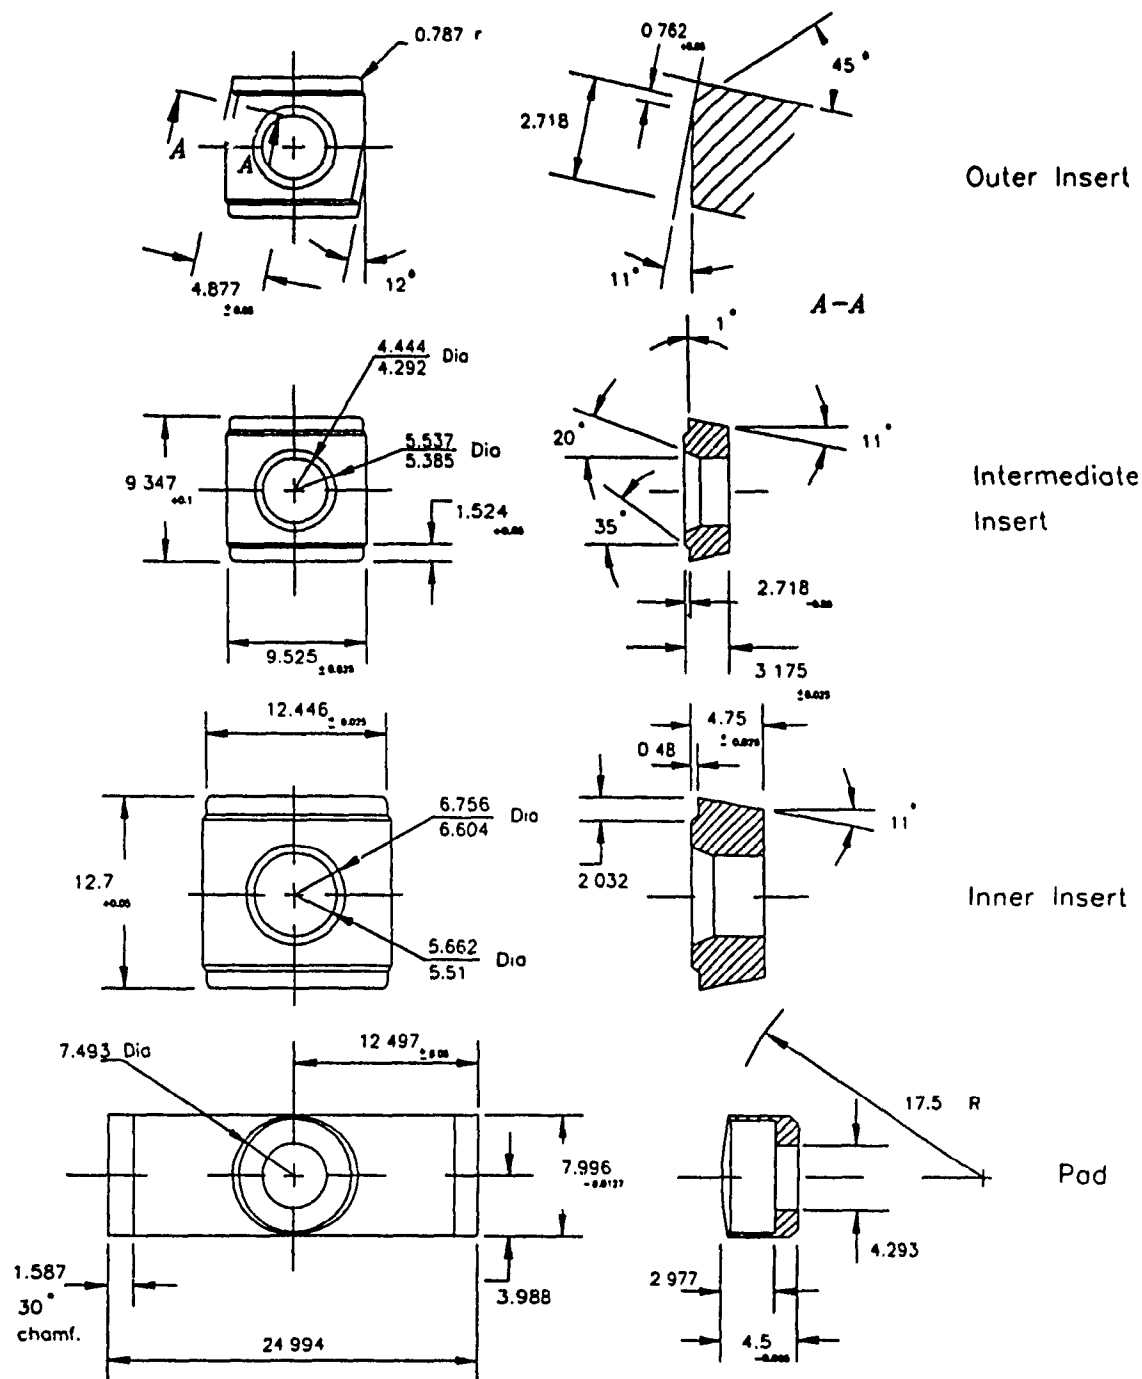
THE PROTOTYPE'S INSERTS AND PAD
